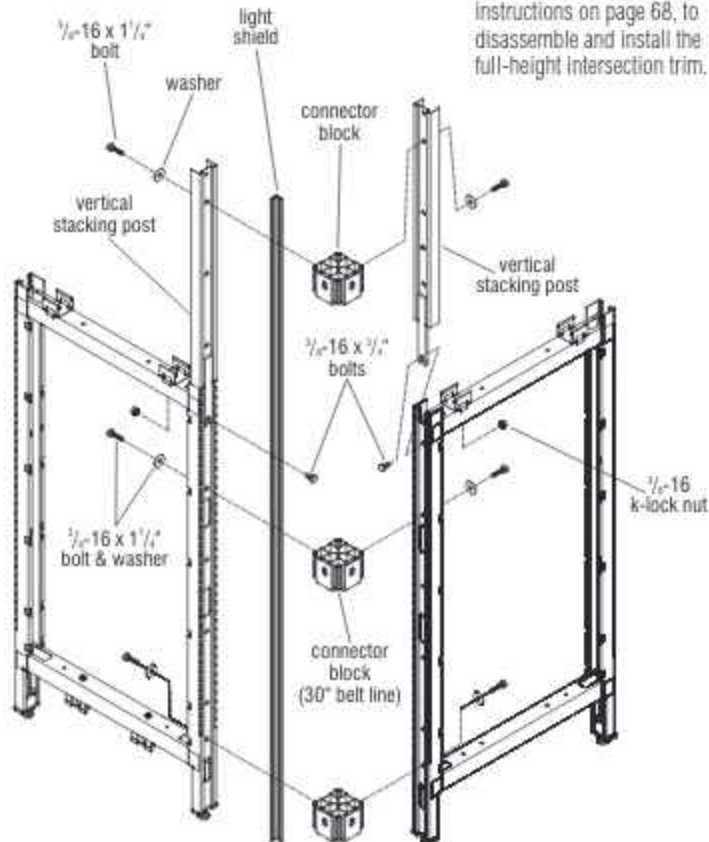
Stacking Sections (aluminum frame) - Full-Height Intersection
